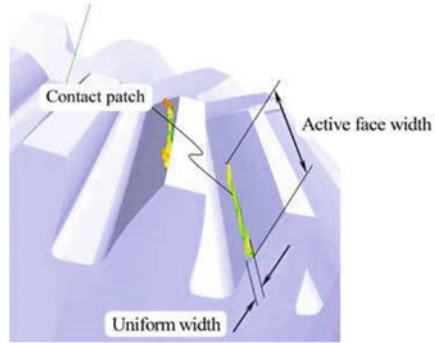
Predicted contact patch in geometrically-accurate intersected-axes spiral bevel gears.
